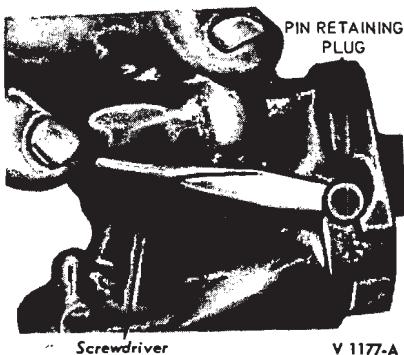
Rocker Arm Pin Retaining Plug Removal
